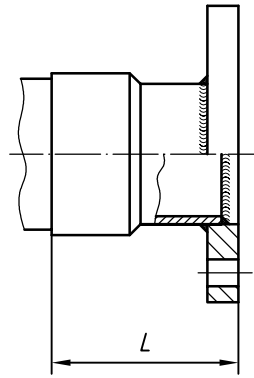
Fixed plate flange for welding (FF/01)
